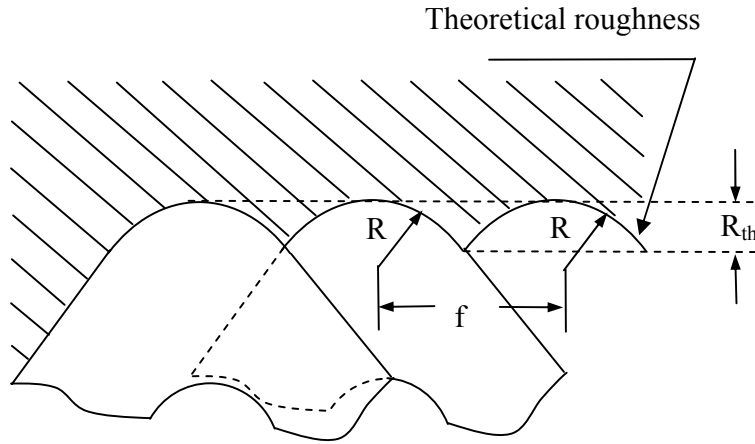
Illustration of kinematics/tool geometry induced surface roughness.
